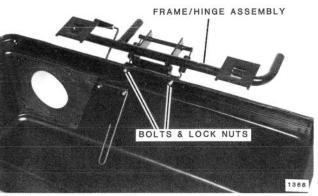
Install Frame/Hinge Assembly to Bagger Top
